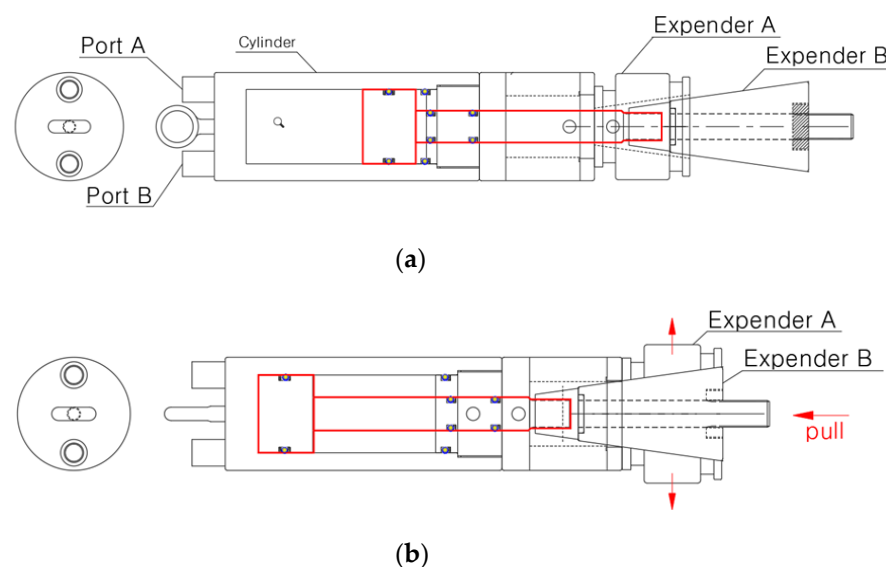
Design of prototype of hydraulic expansion equipment: (a) Cross section before expansion of steel pipe; (b) Cross section after expansion of steel pipe.
